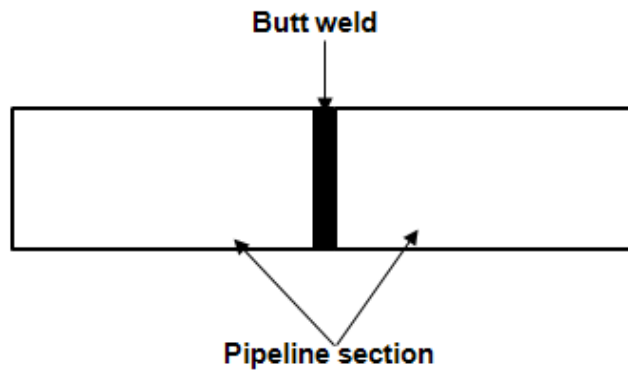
Schematic illustration of butt weld pipeline repair
